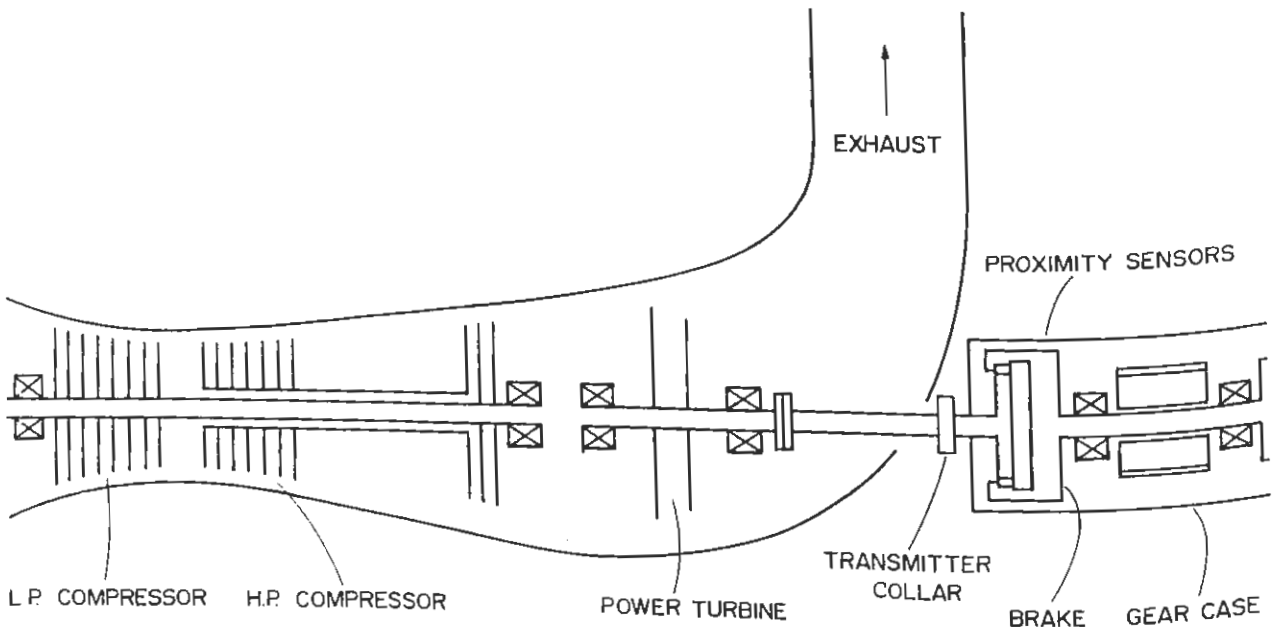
Gas Turbine-Gearbox Shaft of USCGC HAMILTON
